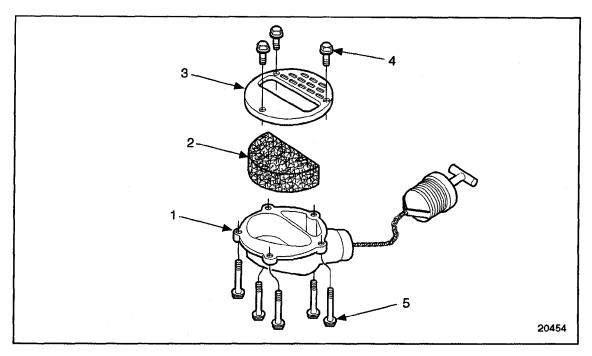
Breather-Oil Fill Housing Bolt Location
